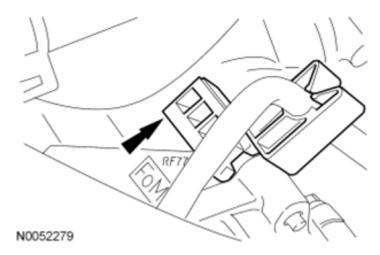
Locating Oil Level Indicator Courtesy of FORD MOTOR CO.
